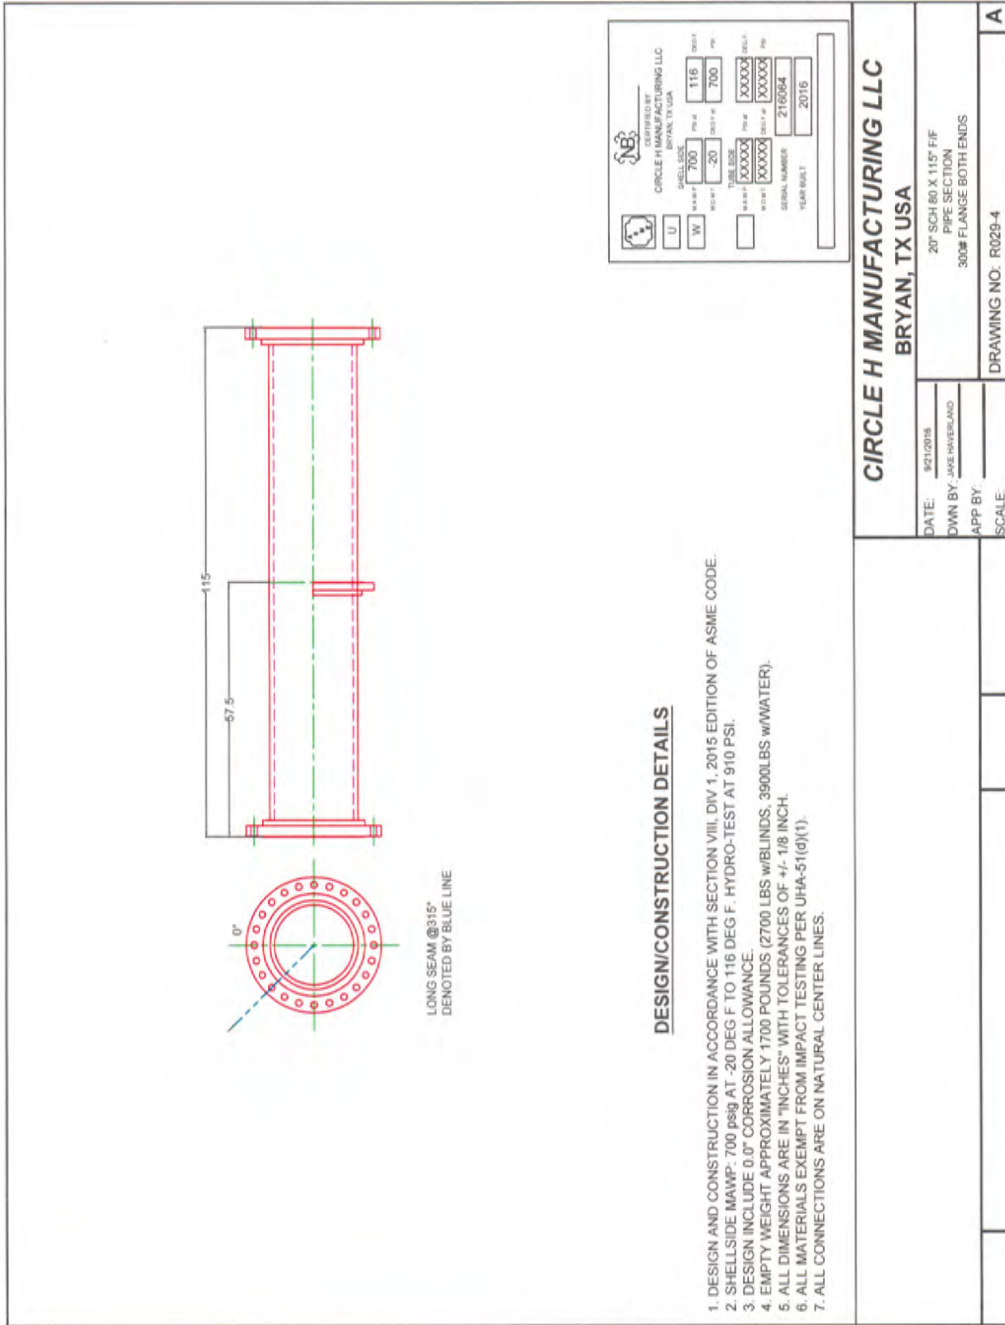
CIRCLE H MANUFACTURING DRAWING OF THE DRIVEN AS CERTIFIED AND APPROVED.
